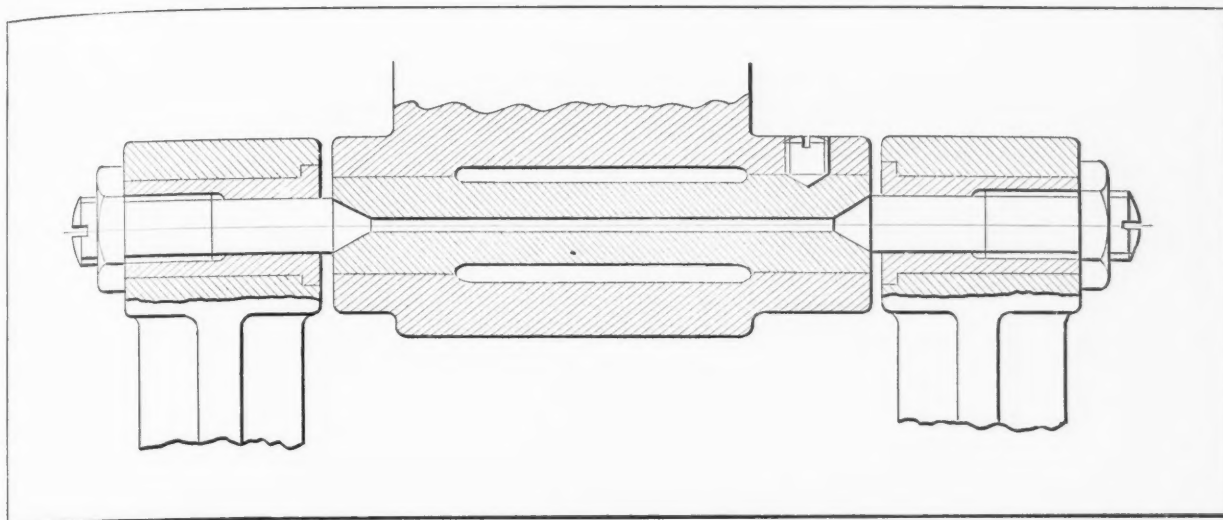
Pivot Bearing with One-piece Hardened Bushing or Plug
